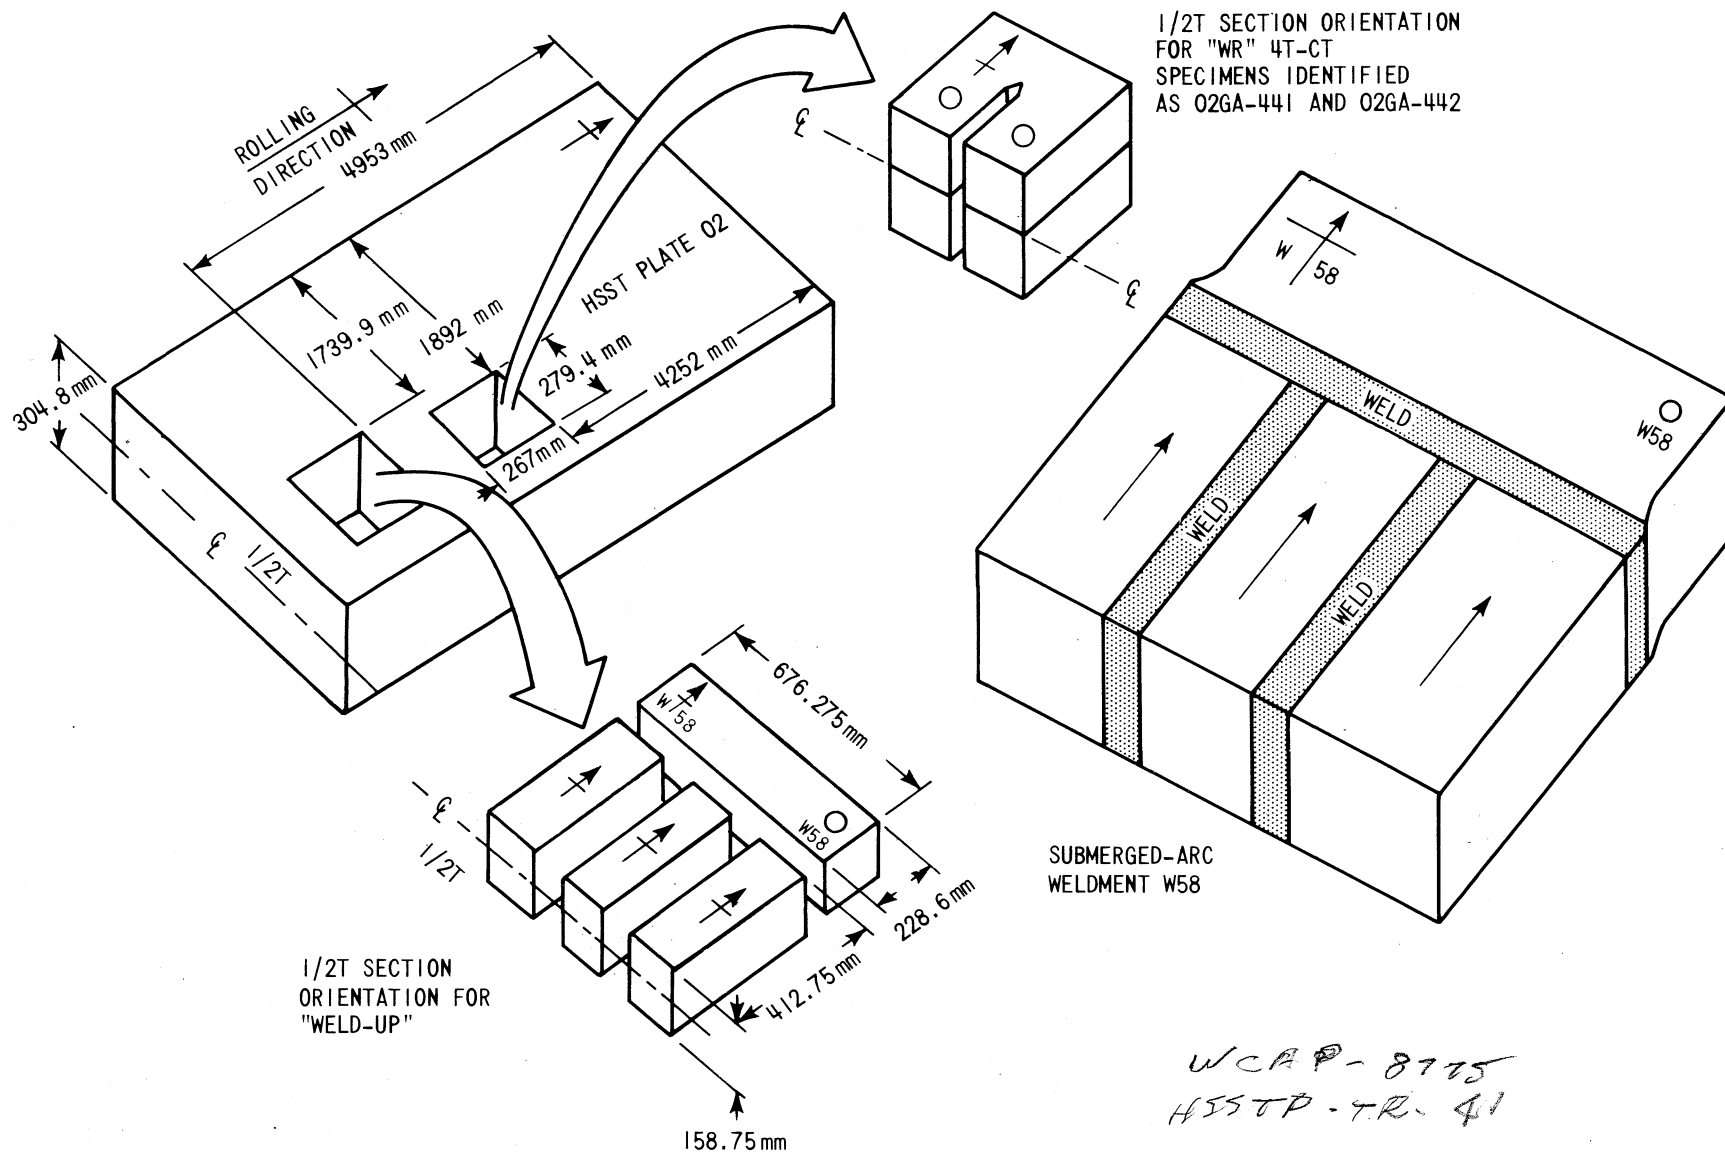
Location and Weld-Up Orientation of the Material for the RW, WR, and Weldment 4T-CT Specimens and the 0.394T-CT Small-Thickness Specimens
